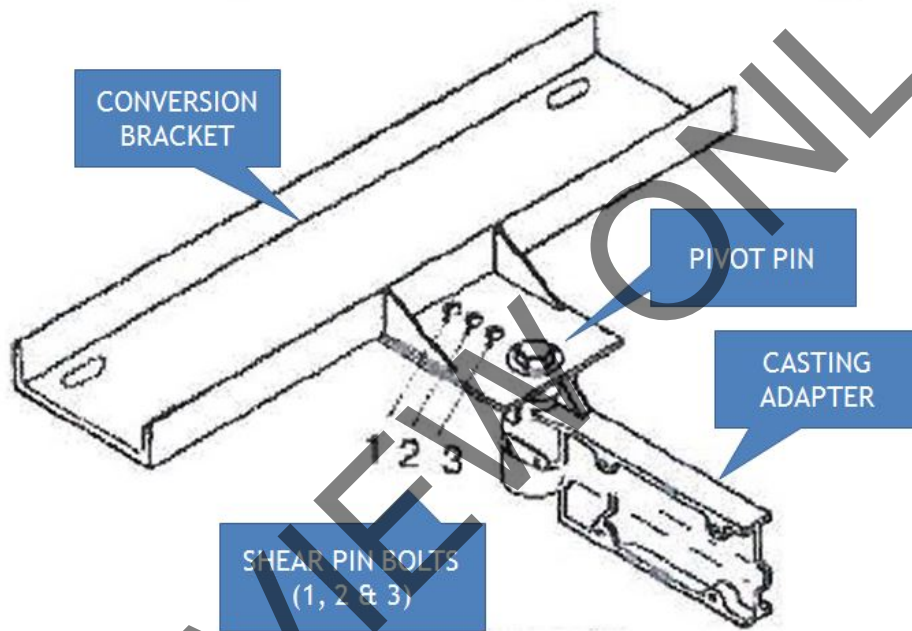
Safetran pivot breakaway, casting adapter and conversion bracket, and pivot pin
